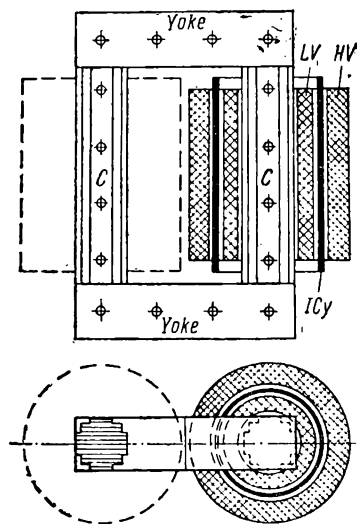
Core of a single-phase core-type transformer with concentric winding
